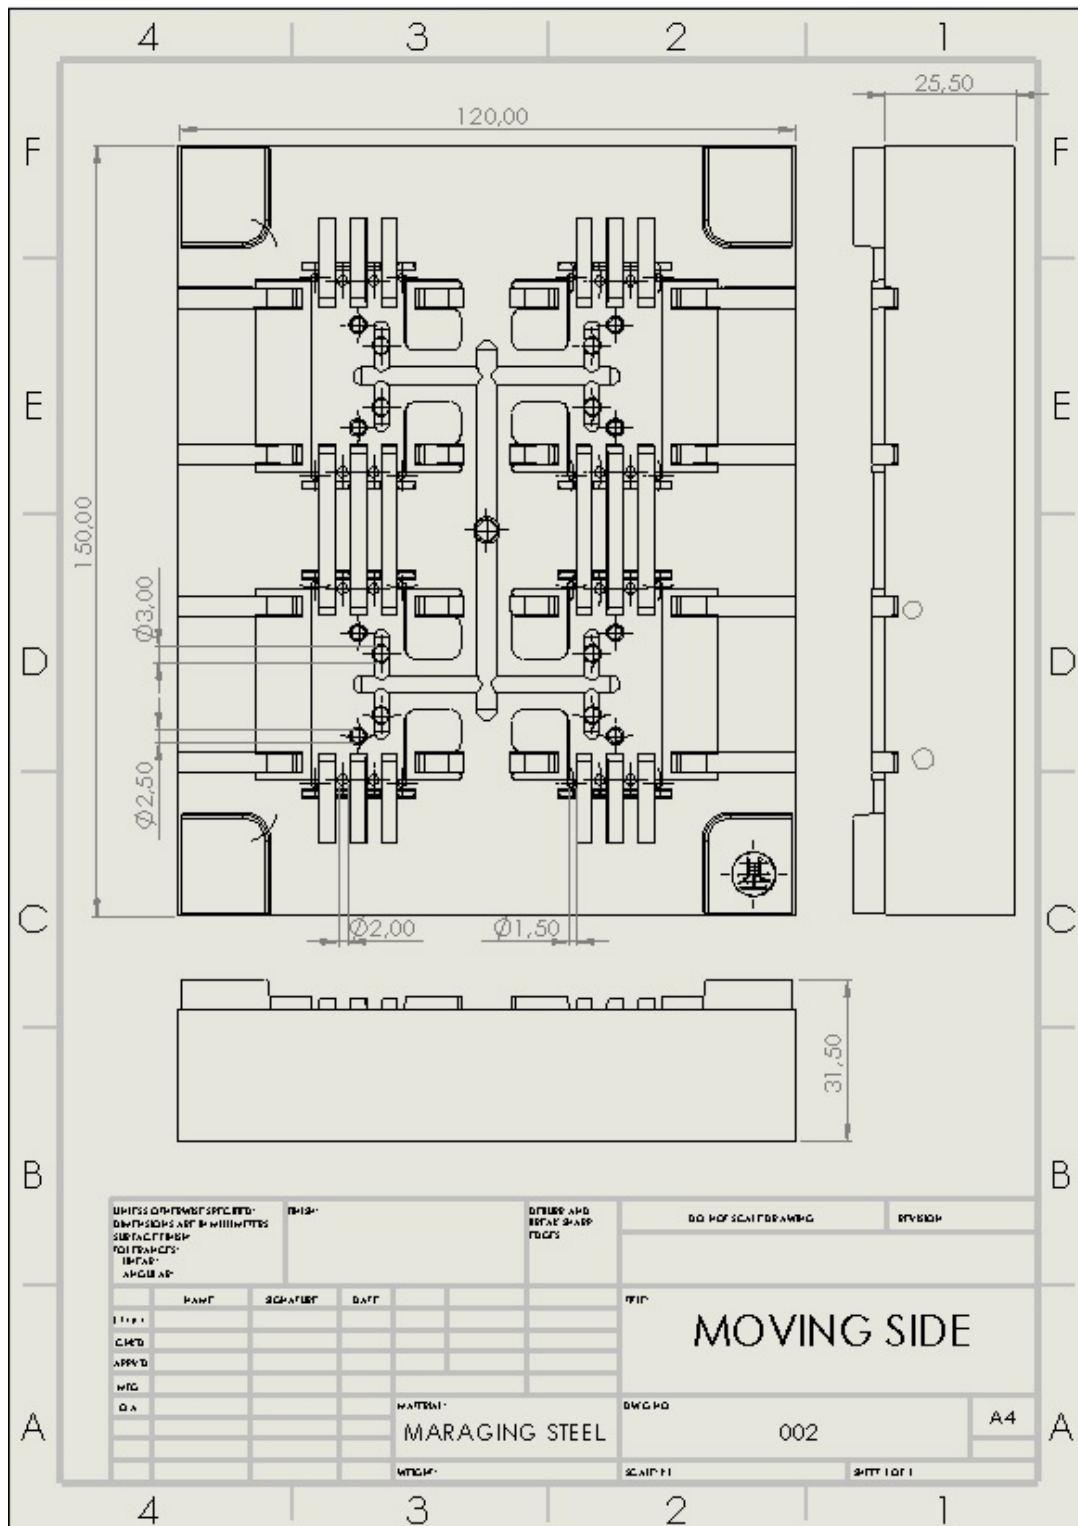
CAD draft showing the moving side of the Altech -UEC mould
